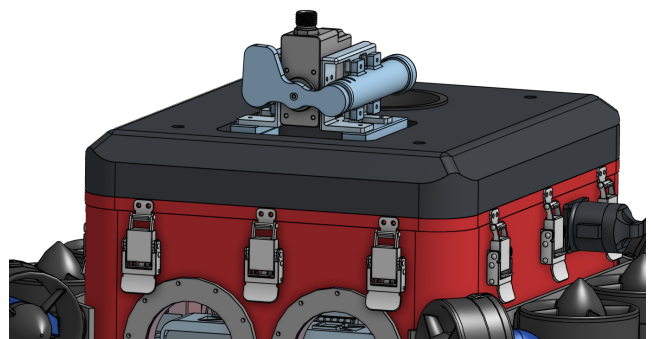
Torpedo launcher mounted on the buoyancy foam
